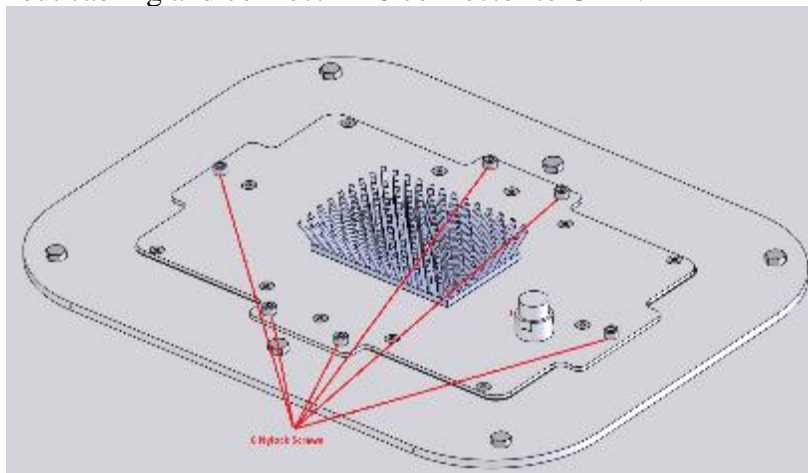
Image indicating the position of the screw holes for installing the UAD on the upper mounting plate.
